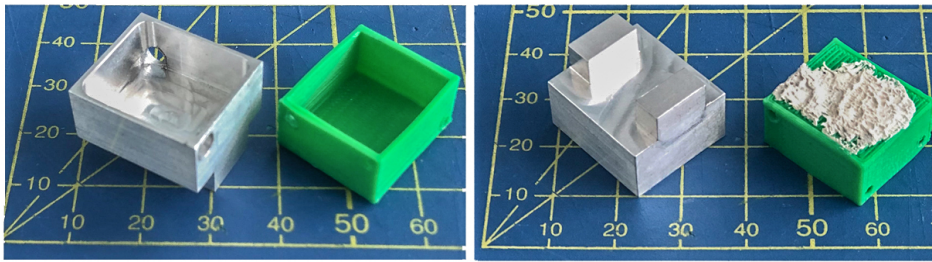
Comparison of the milled and 3D printed propellant tank (white stain on the 3D printed tank is glue used for assembly of the propulsion system)
